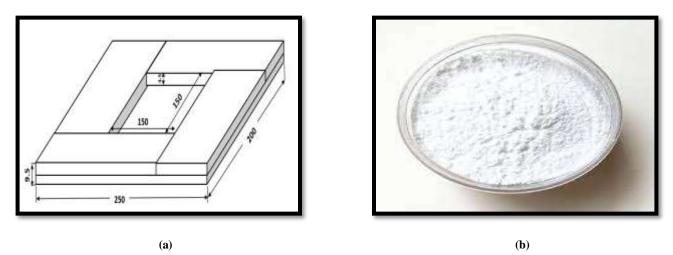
(a) The Dimension of Prepared Mold & (b) Zirconium Oxide.
